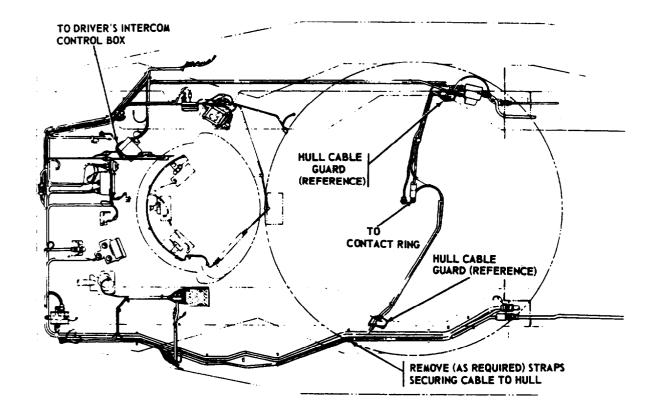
Removal/installation-external intercom control box-to-bulkhead cable assembly (2 of 2).
